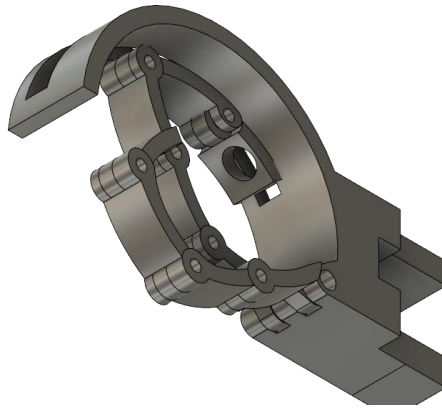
The CAD design of EE-2 Opposable Thumb
